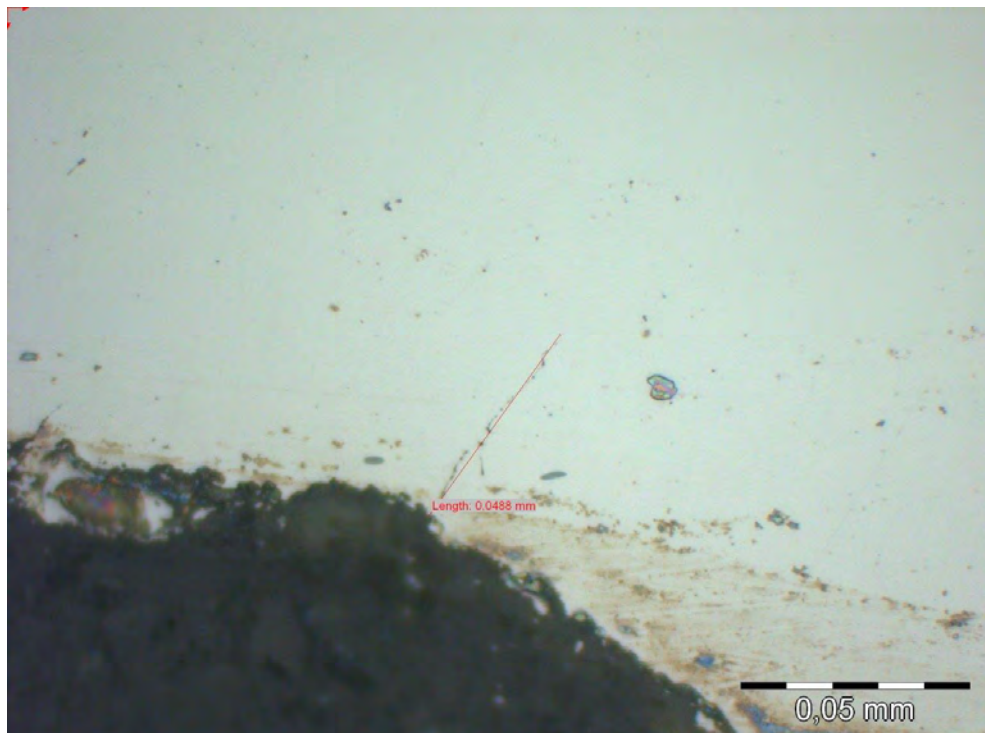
Crack at segment B, second ridge on barrel no. 8832/6713
